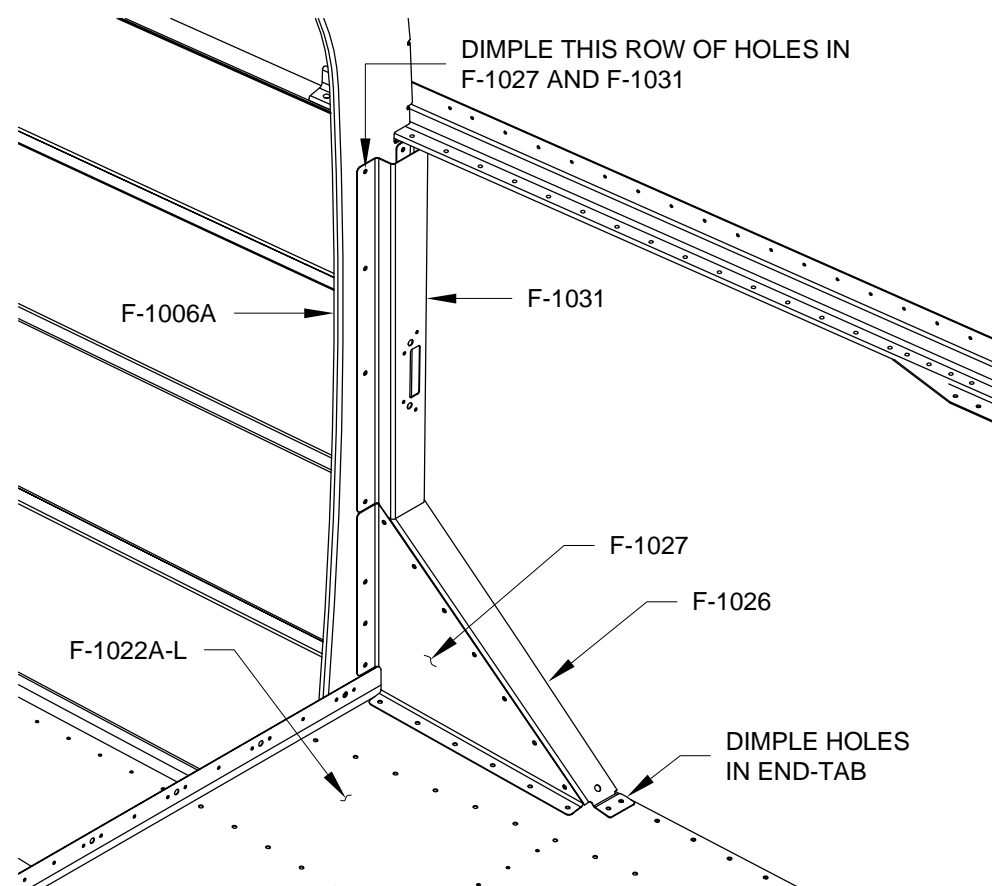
DIMPLING THE UPPER AND LOWER BAGGAGE DOOR SEAL CHANNELS AND CLOSE-OUT PANEL
